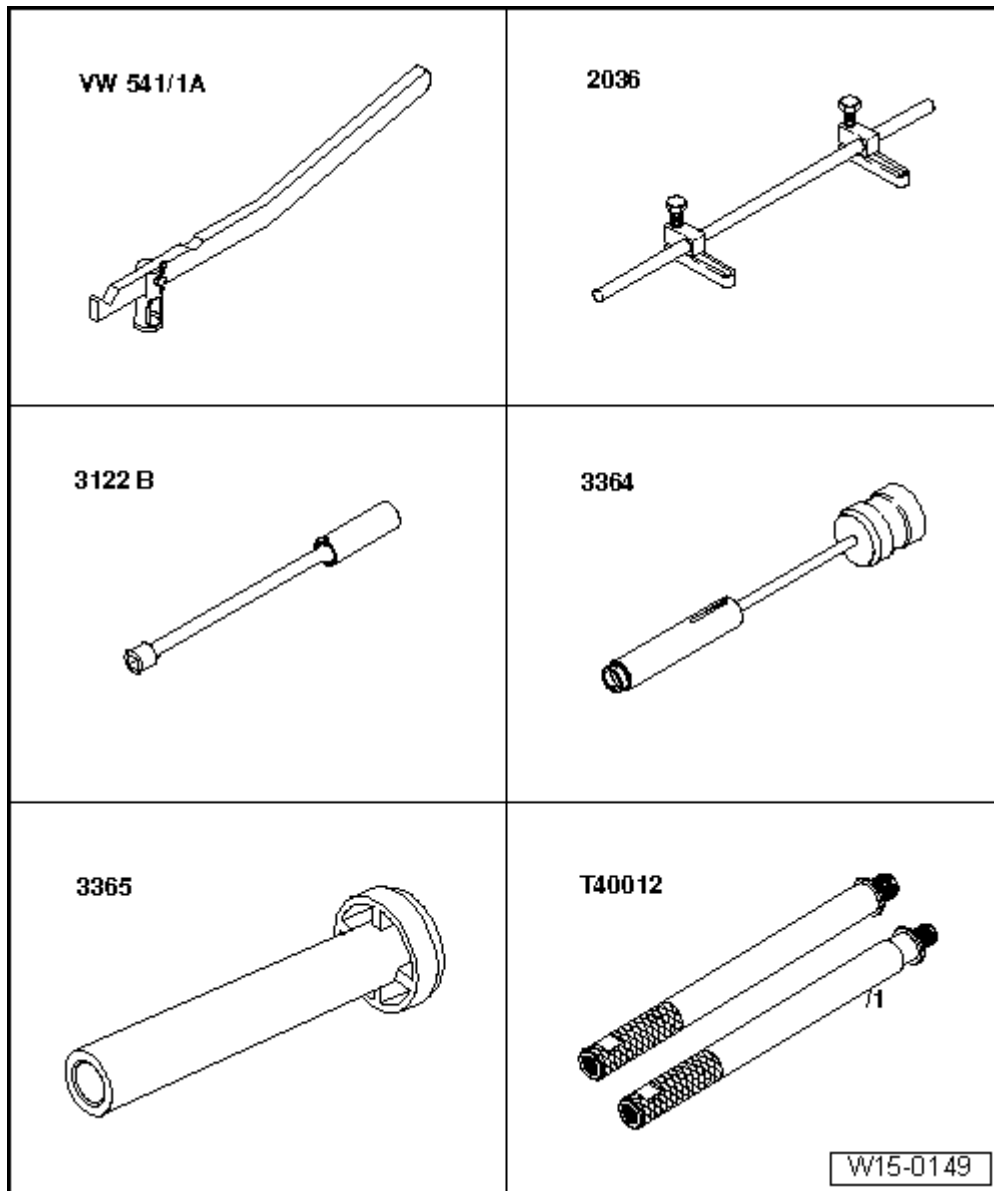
Identifying Special Tools -- Valve Stem Oil Seals, Replacing
